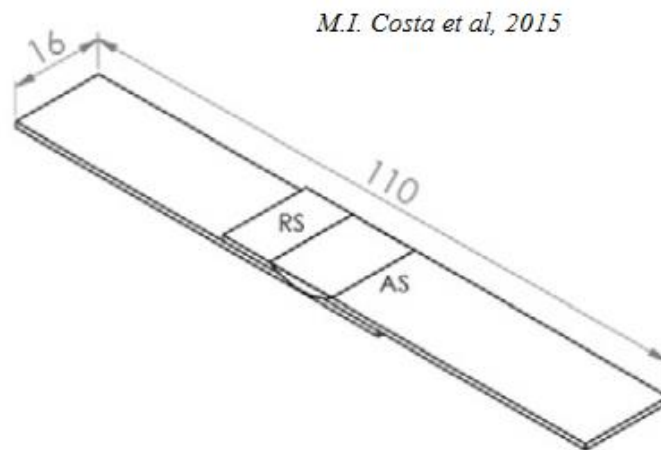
Example of an overlap shear test specimen cut from a long FSW joint [40]
